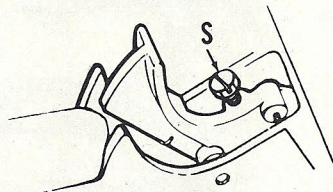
Fast idle adjustment on some models is performed by turning adjusting screw (S) on bottom of trigger.
